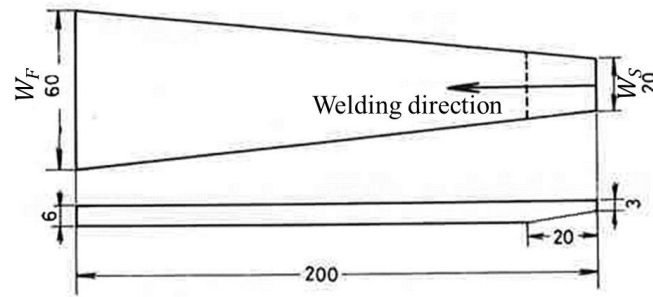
Specimen dimensions of taper shape cracking test [Mat82].
